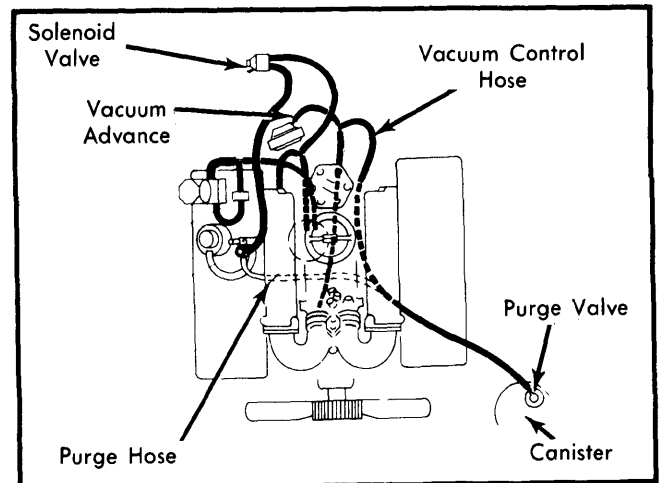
6 Cylinder Models Fuel Evaporation System (From Carbon Canister to Engine)
